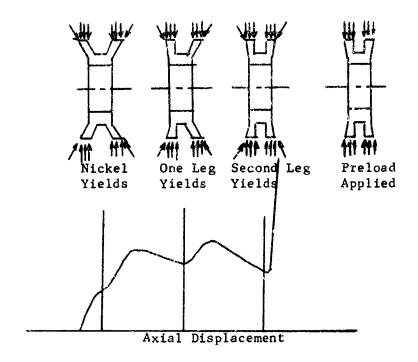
Sealing-Force Mechanics of Bobbin Seal
